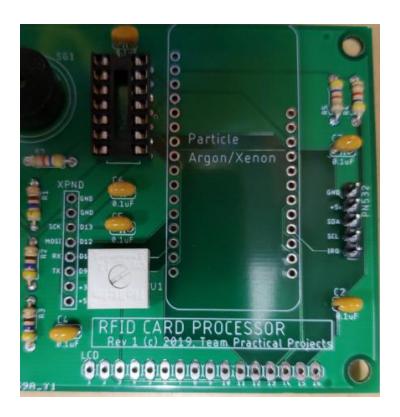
5 Pin Header Assembled onto the PCB.
